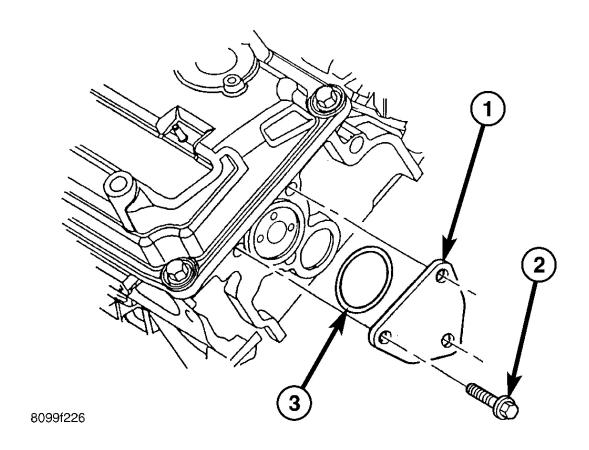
Camshaft Thrust Plate, Bolt & O-Ring Courtesy of CHRYSLER LLC
